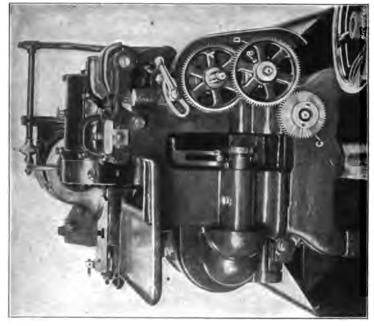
End View of No. 2 Machine showing Arrangement of Change Gears
